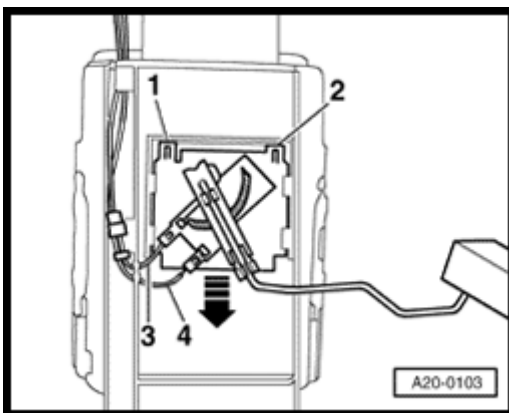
Fuel Gauge Sender Connectors & Retaining Tabs
